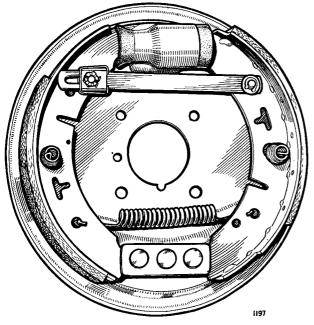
The left-hand front brake assembly (the right-hand assembly is assembled the opposite way round).
